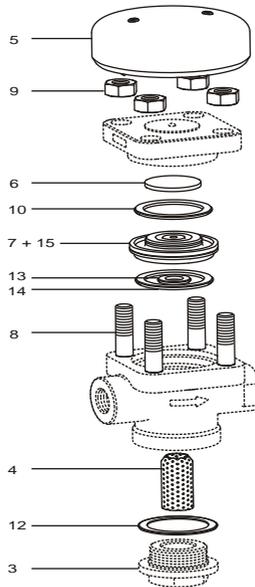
Parts available as spares (Heavy Outline) for FMTD76-M Screwed and socket weld
